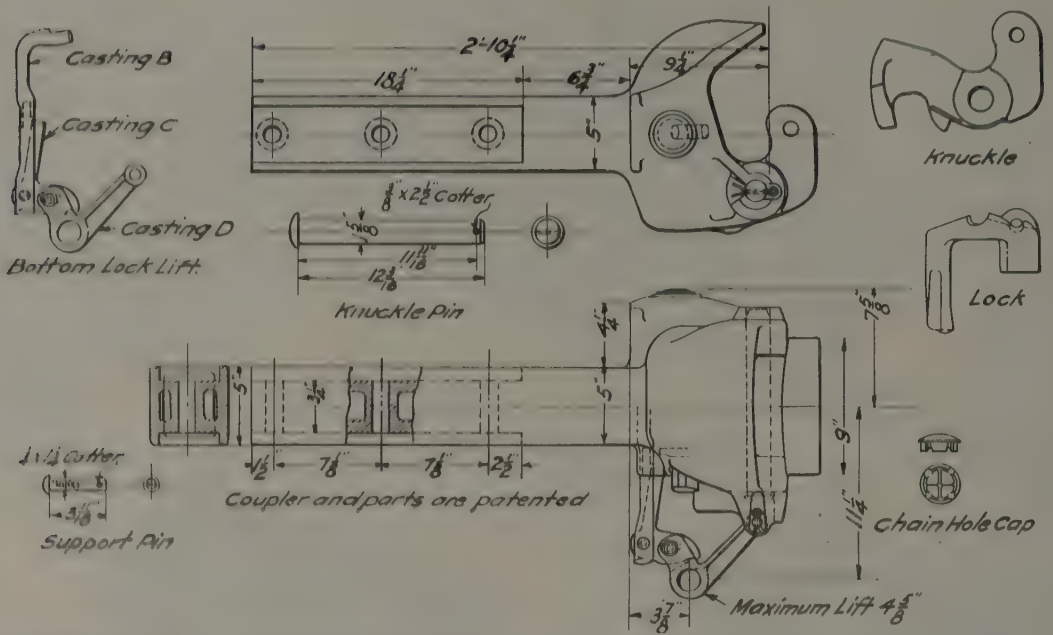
Sharon Bottom Operating Passenger Coupler and Parts. National Malleable Castings Company.
